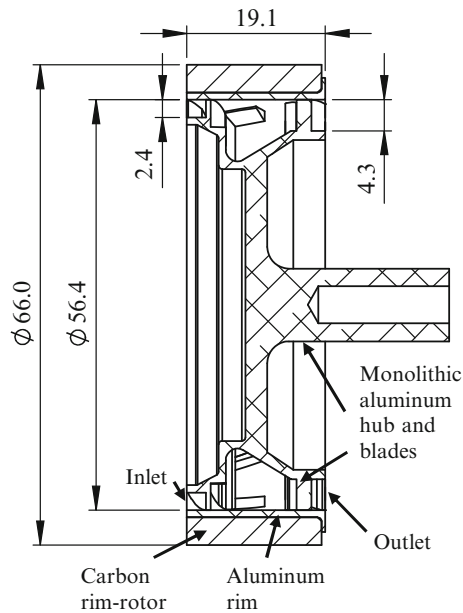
Cutaway view of the aluminum and carbon-PEEK R4E design (dimensions in mm)
